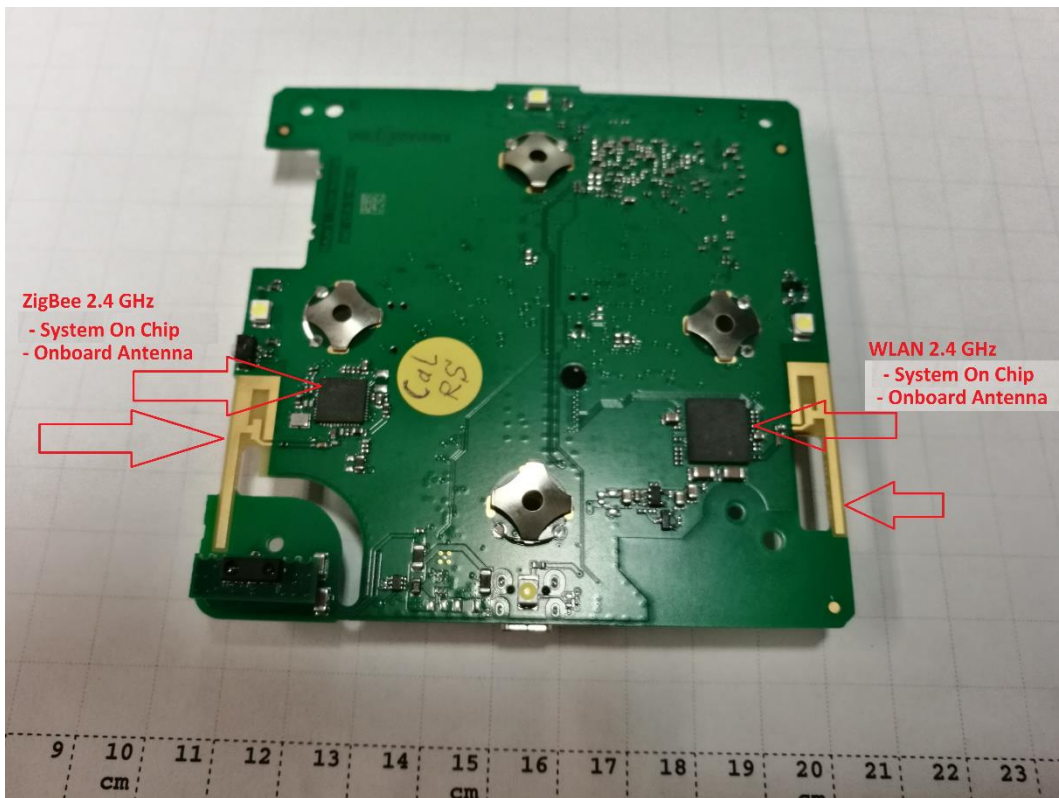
ViCare Thermostat –Main PCB Top Side
